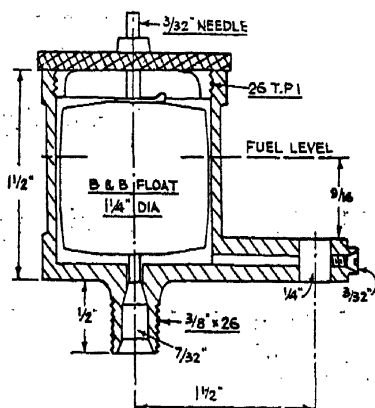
Typical Design of Model Carburettor Float Chamber for 15 to 25 c.c. engine.
